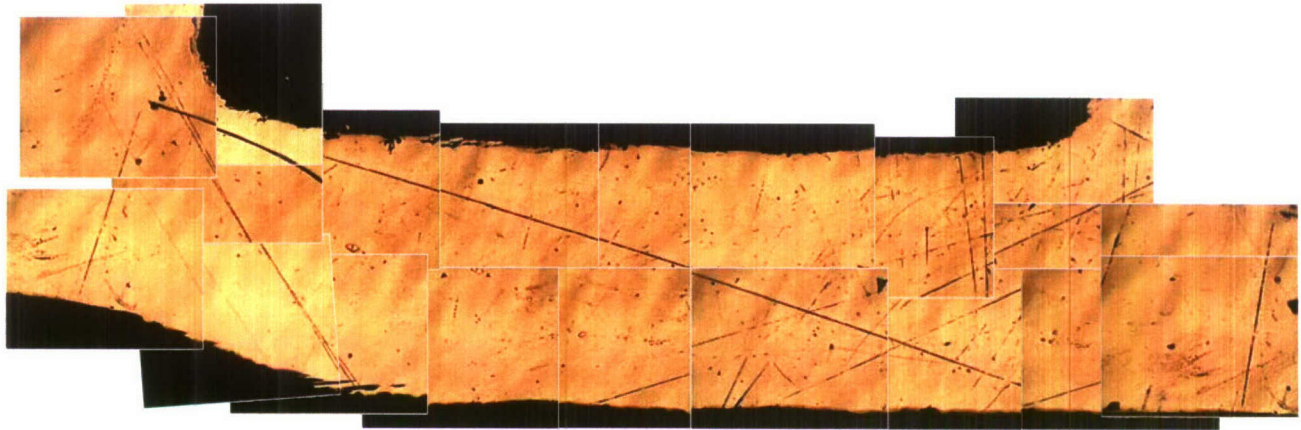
Cross-section of steel plate EAFSW weld using 3/8-in TZM molybdenum tool with 3/16-in conic tip at ~900 rpm. The “worm hole” has been eliminated, however a significant furrow remains. Scale: ~15X
